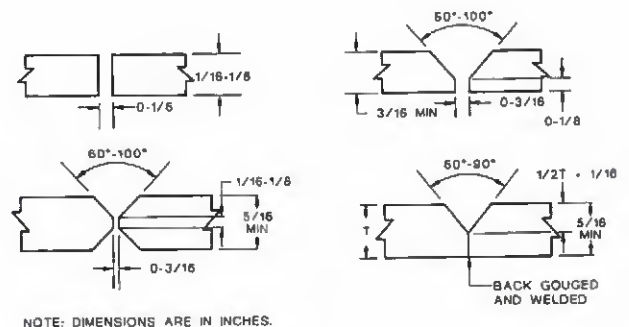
Typical joint designs for gas shielded arc welding of aluminum.
